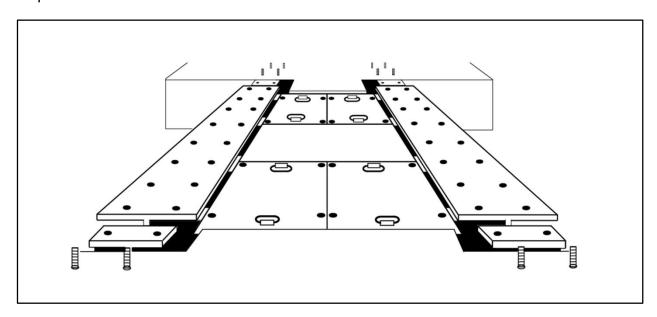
8760 Steel Deck Railroad Track Scale
